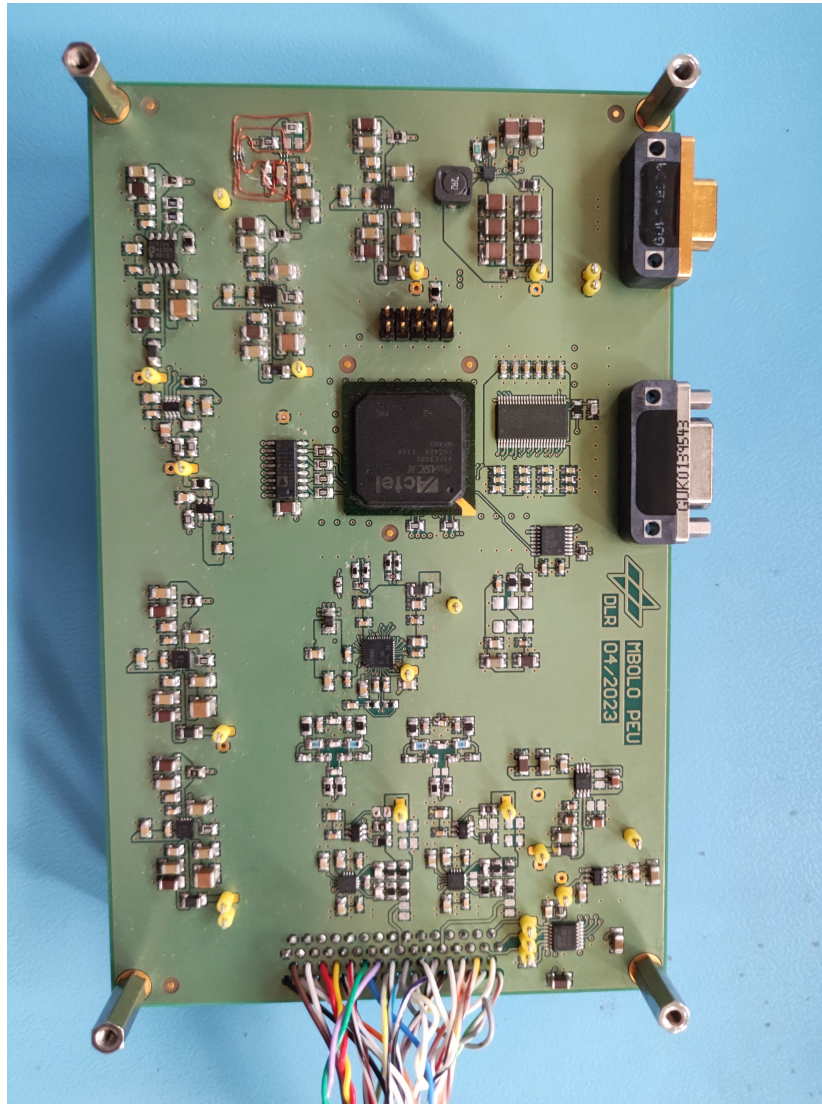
PEU board Topside View - *The FPA connector on the bottom of the figure uses a so-called pig-tail connection. This provides a lot of flexibility during testing or when handling the PCB.
